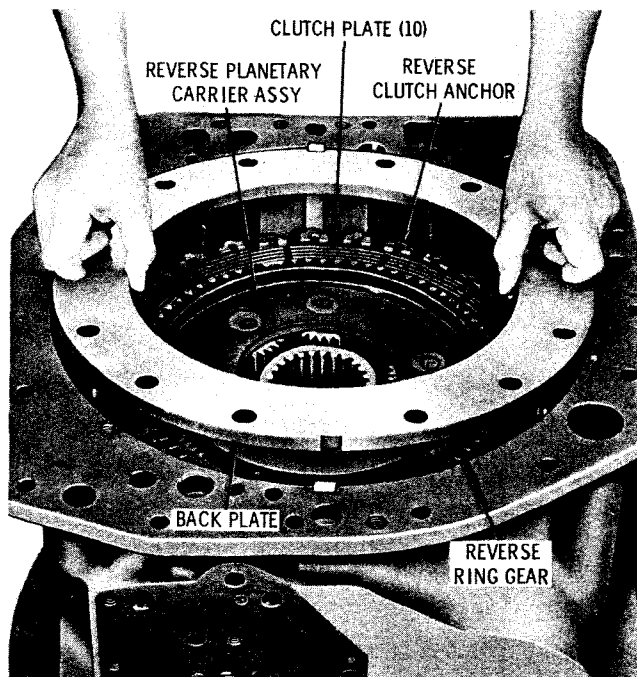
Removing forward-and-reverse clutch back plate (5631 models)
